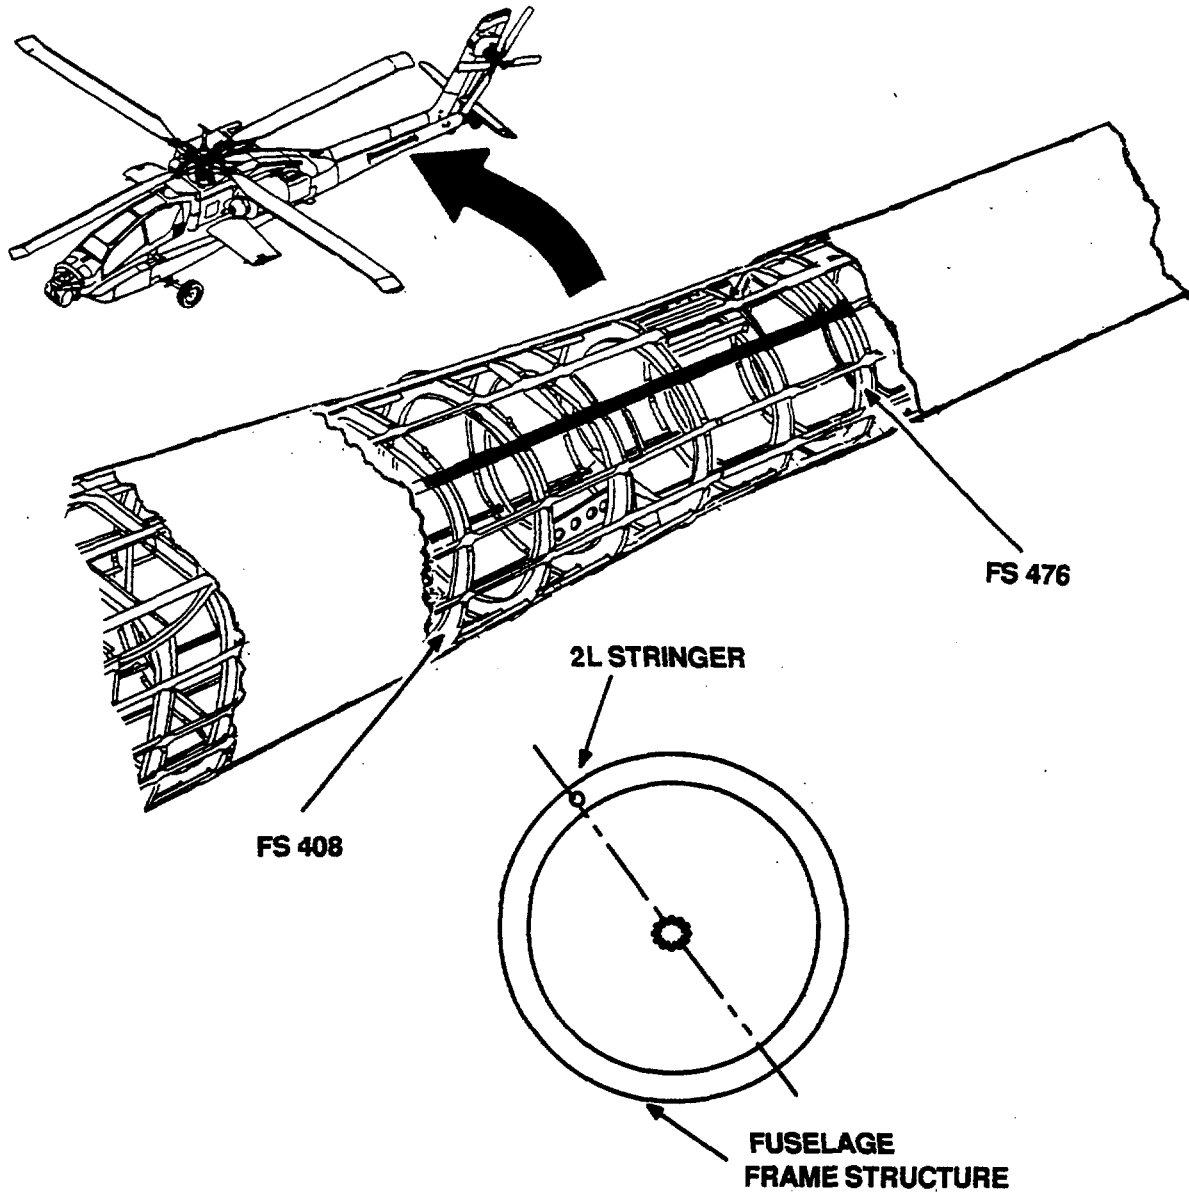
Inspecting 2L Stringer for Cracks, AH-64 Aircraft
